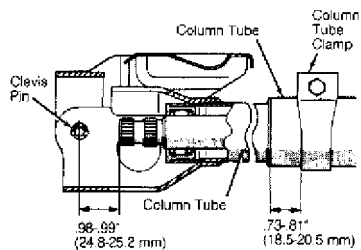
Installing Column Tube Clamp (Eclipse & Galant)
